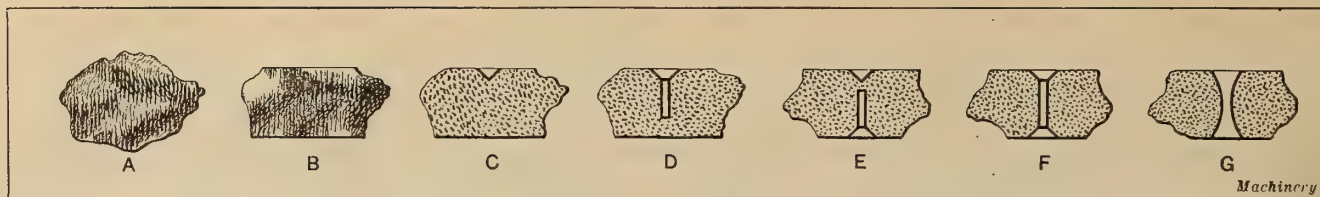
ROUGH DIAMOND A AND CROSS-SECTIONAL VIEWS SHOWING SUCCESSIVE STEPS IN THE PROCESS OF MAKING WIRE-DRAWING DIES
